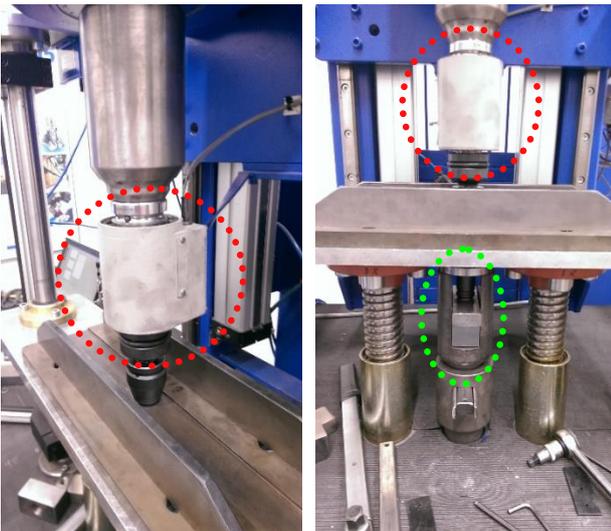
The torque meter are marked with a red circle. A tool to turn the nut is mounted on the torque meter, while the green circle marks the tool to hold the head of the bolt.
